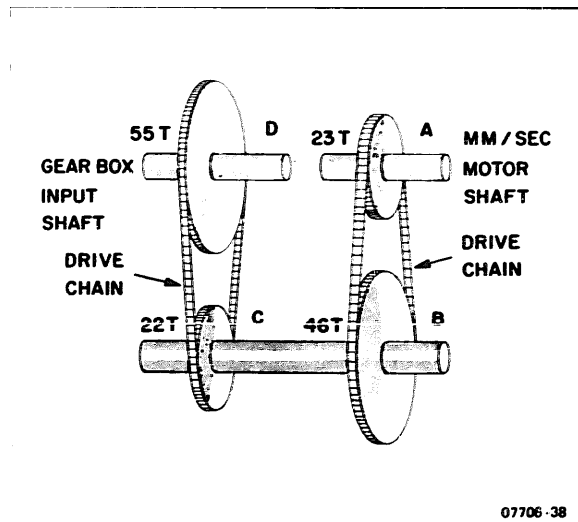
Power Flow Diagram From MM/SEC Motor to Gearbox, "C" and "CW" Model Recorder
